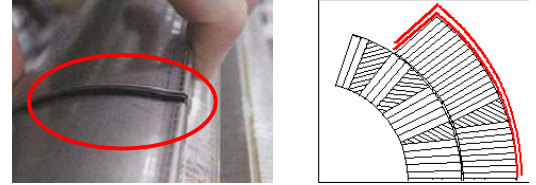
Assembly of a double coil protection sheet observed after de-collaring (left); illustration of the defect (right).
